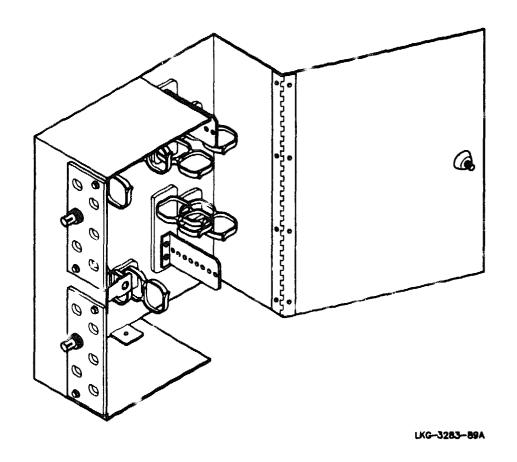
Wall Mount Bracket and Cable Clamp Bracket Installation
